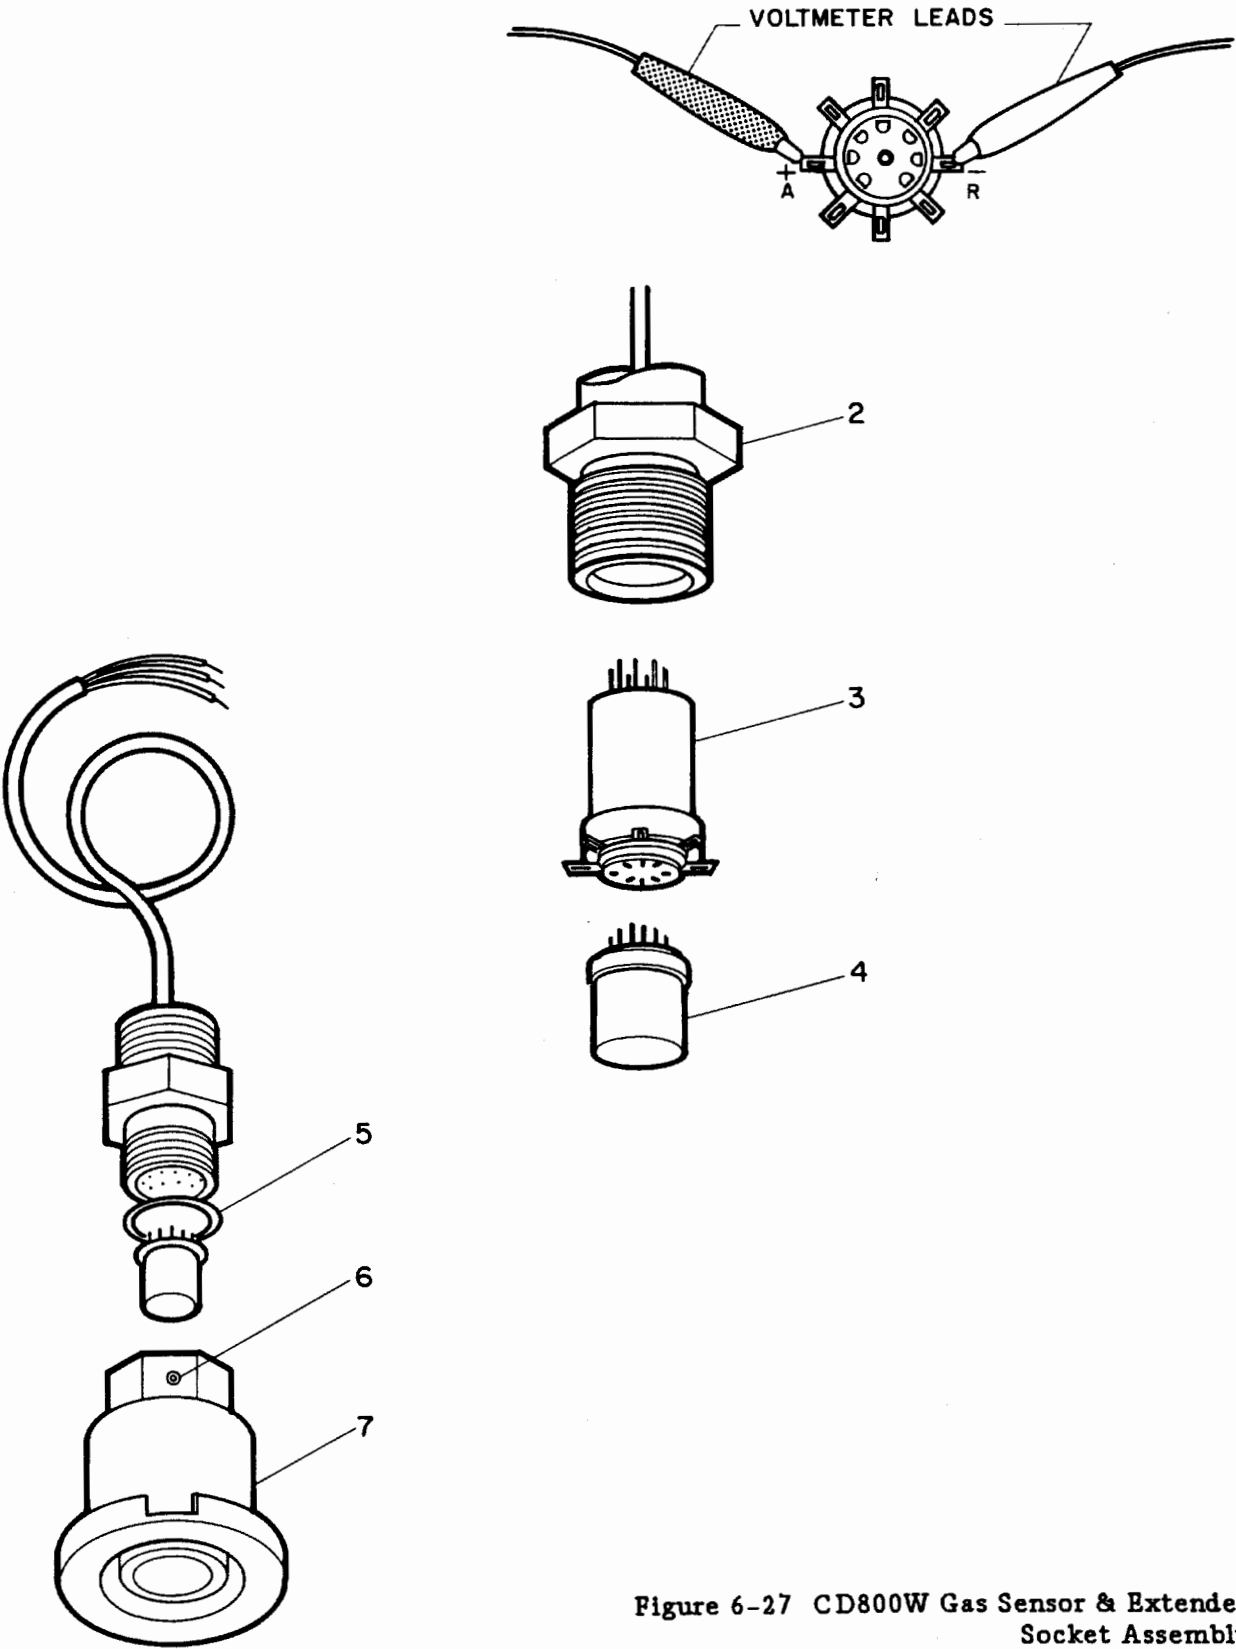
CD800W Gas Sensor & Extender Socket Assembly
